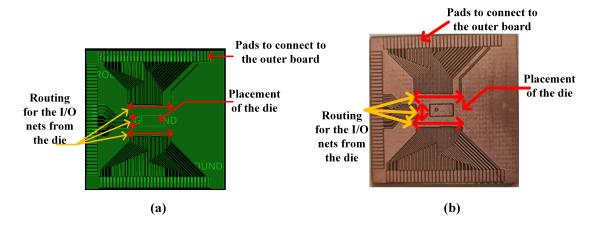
(a) Mask of the inner board and (b) Board fabricated based on the mask
